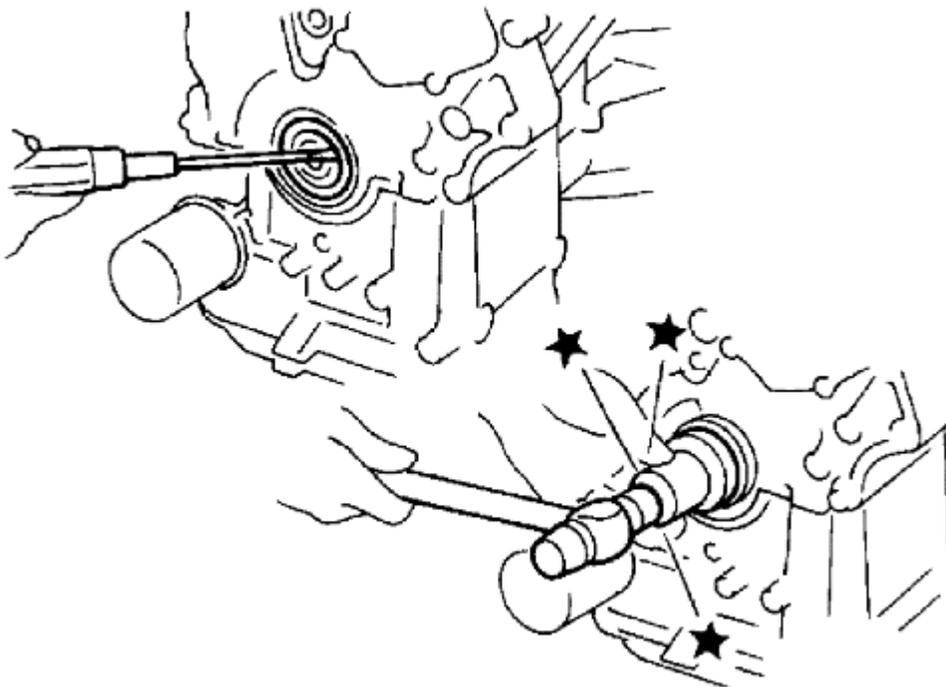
Removing Front Oil Seal Using Suitable Tool
